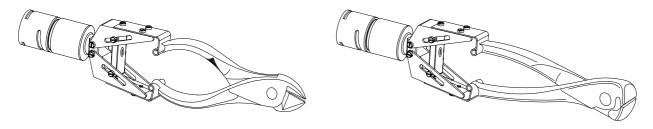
For cutting twin-core cable up to 1,2 mm
